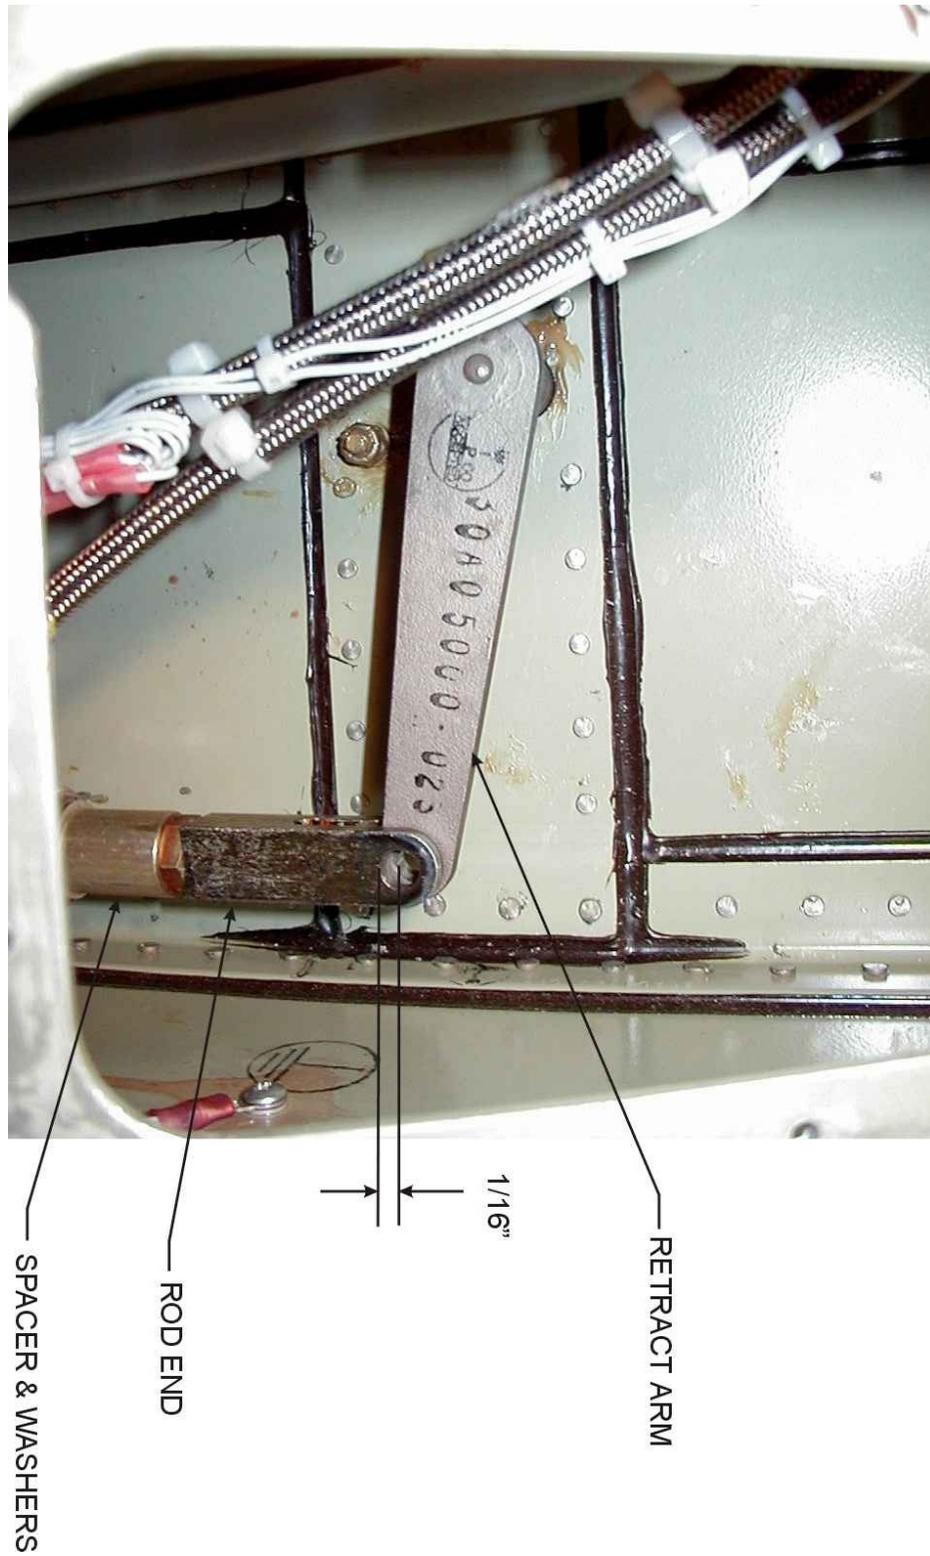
VIEM, 1/16" CUSHION, GEAR UP ADD SPACER AND WASHER FOR ADJUSTMENT
